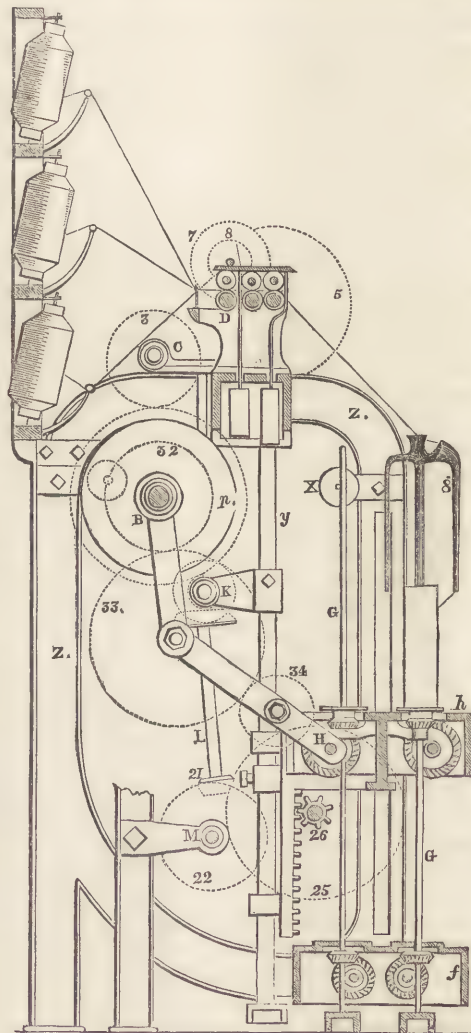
SECTION OF THE BOBBIN-AND-FLY-FRAME.
